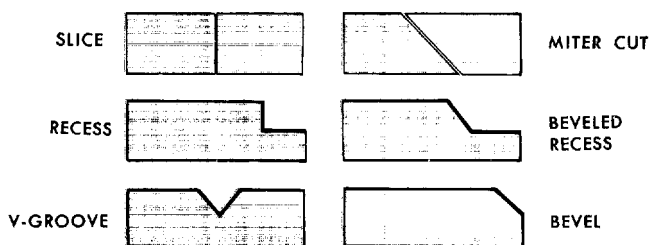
Fig. B. Cuts Obtainable with Special Cutting and Beveling Tools.
